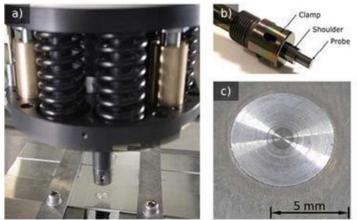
Robotic arm (a), tool (b), joint surface (c) [15]
